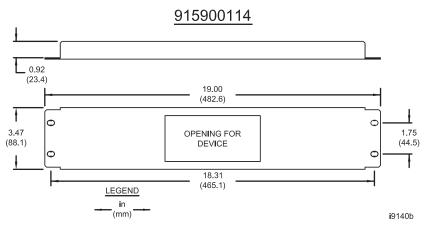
SEL-9510 Single-Opening Panel Cutout Dimension Drawing
